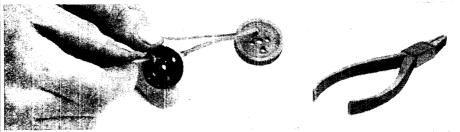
This photograph shows the assembling of the first wire. Note how the wire is threaded through both disks. The assembly must be done very carefully to ensure sound contacts
